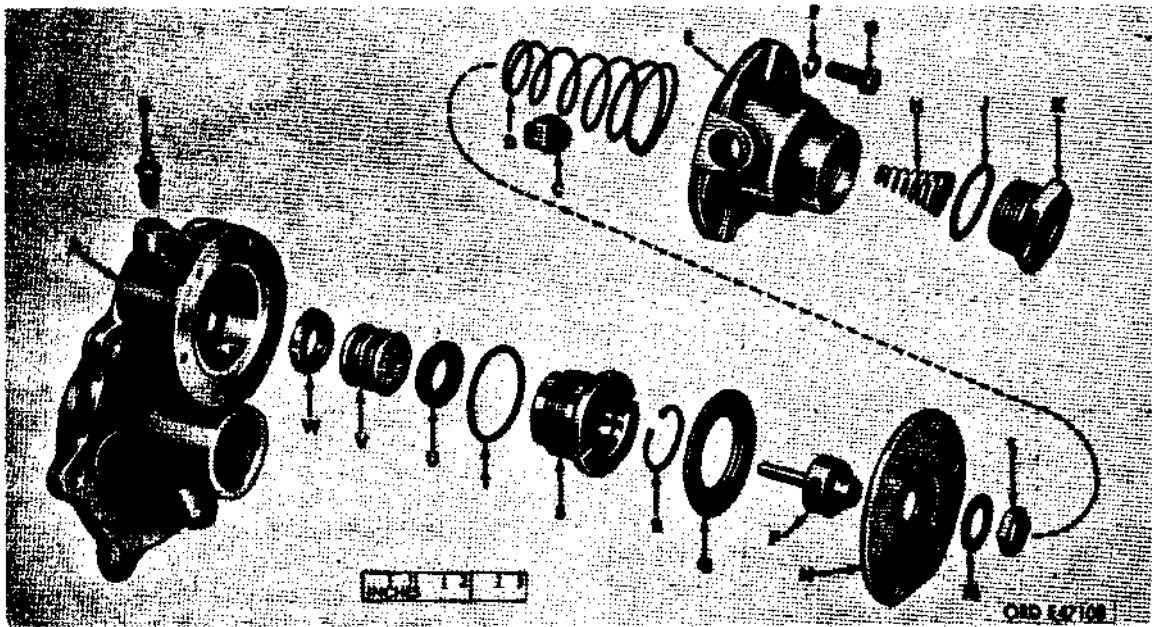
Air-hydraulic (Air-Pak) Power cylinder control valve - exploded view
